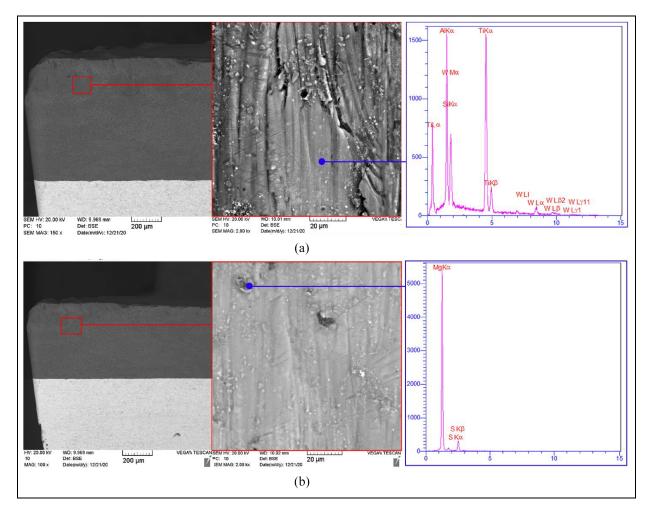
Abression wear on the flank face of CBN tool when machining of AZ91/SiC composites-vol 5% with different particle size at cutting speed 70 m/min and feed rate 0.1 mm/rev: (a) particle size 45 μ m and (b) particle size 9 μ m.
